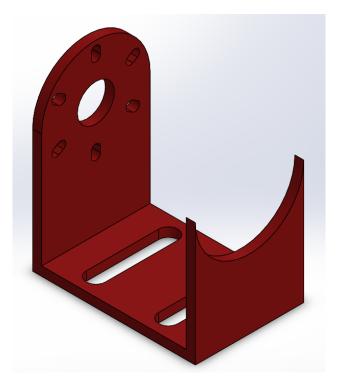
Part used to hold the motor in position below the stack of pamphlets
